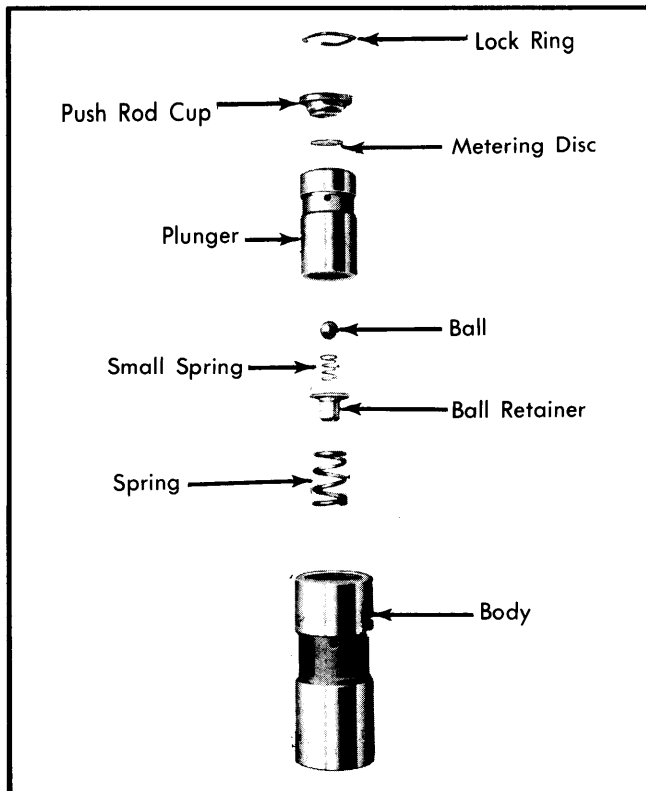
Exploded View of Hydraulic Lifter Assembly
